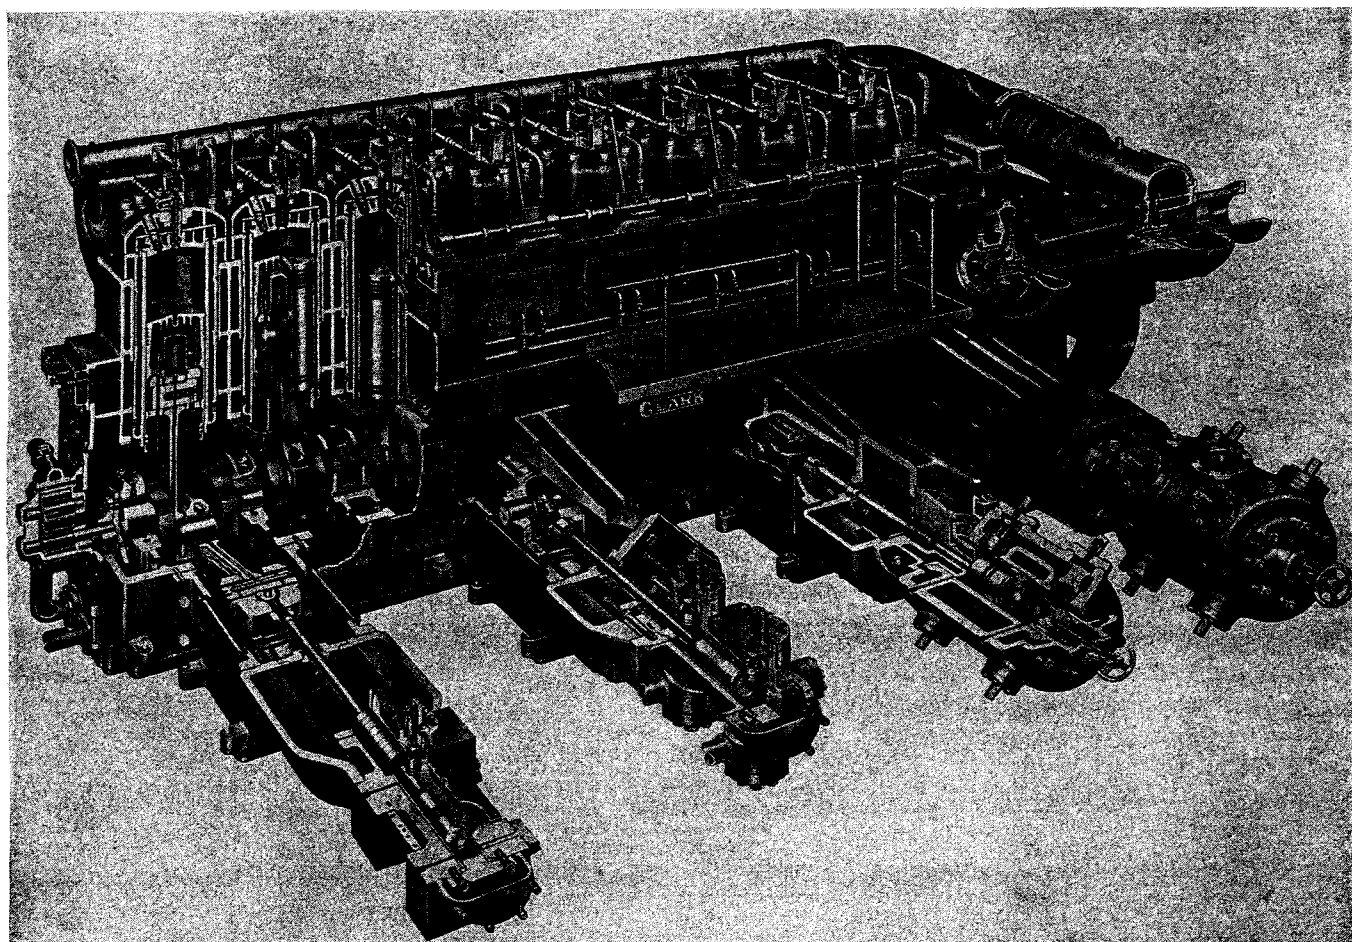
Turbocharged reciprocating engine-driven compressor, 1,500 brake horsepower. (Courtesy Clark Brothers Company, Div. of Dresser Industries, Inc.)
